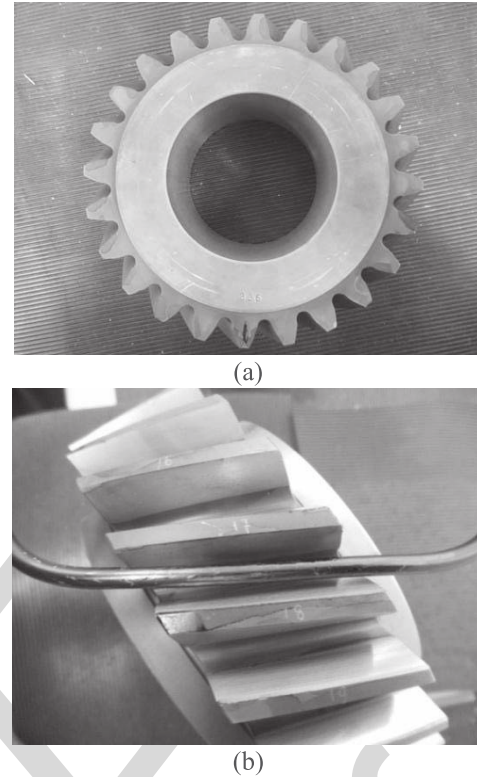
(a) The Gear sample. (b) Fatigue test gear with inductor coil.
